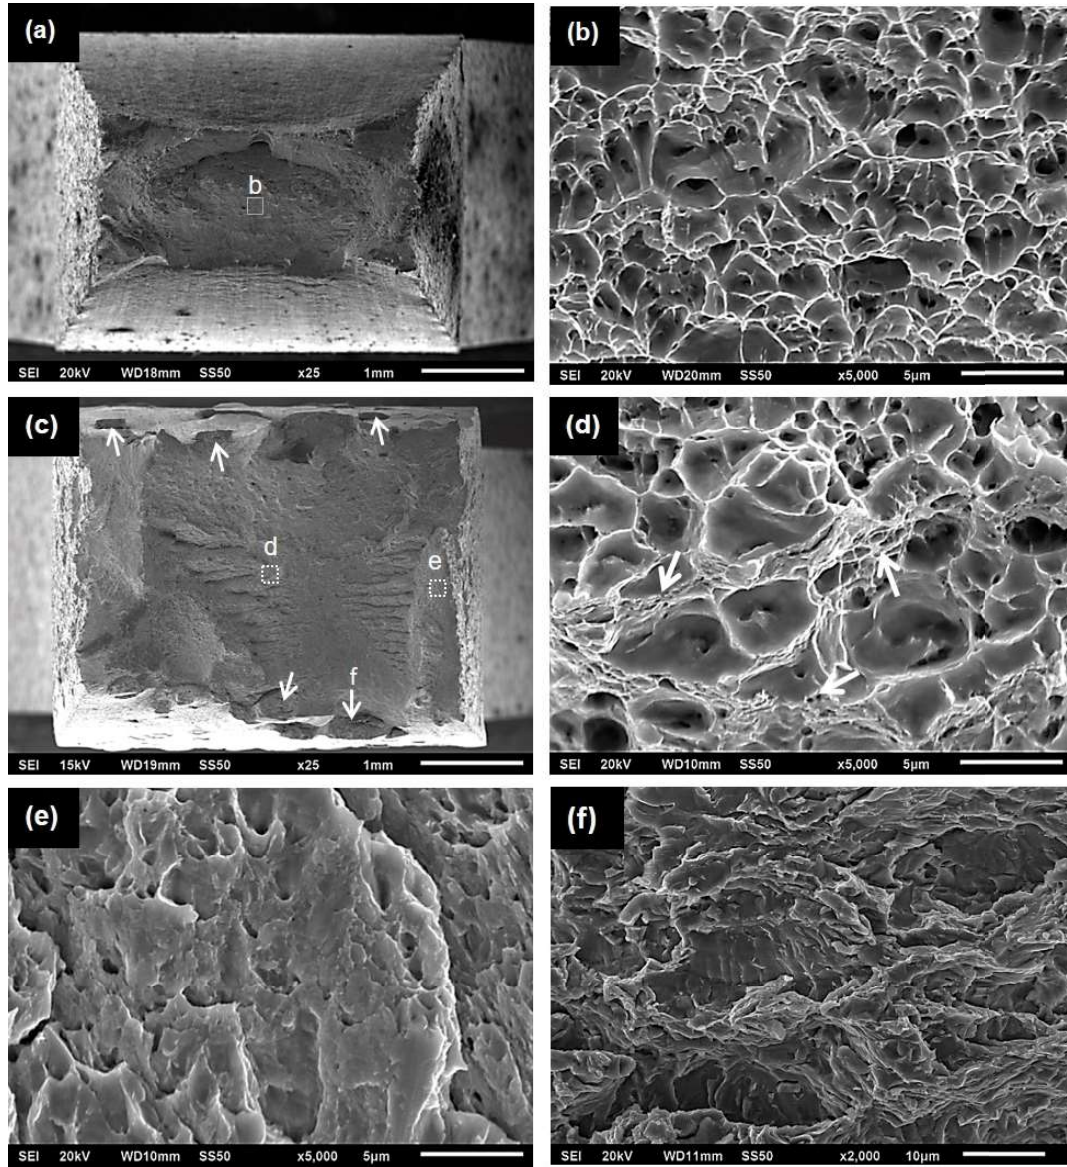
Fracture surface of (a) uncharged sample; (b) magnified image of marked location 'b' in fig. (a); (c) fracture surface of hydrogen charged specimen; (d), (e) magnified images of marked location 'd and e' in fig. (c); and (f) fracture analysis at one of the blister i.e. location 'f' in fig. c
